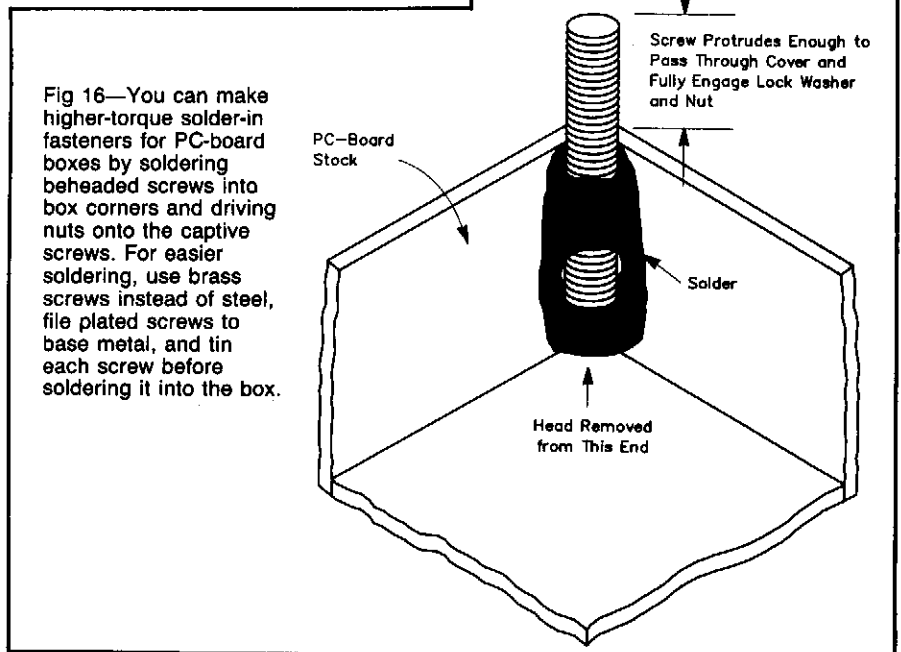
You can make higher-torque solder-in fasteners for PC-board boxes by soldering beheaded screws into box corners and driving nuts onto the captive screws. For easier soldering, use brass screws instead of steel, file plated screws to base metal, and tin each screw before soldering it into the box.
